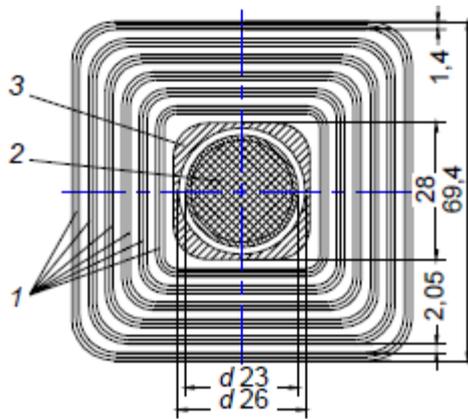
Horizontal section of fuel assemblies IRT-3M type: 1 – fuel rods;
